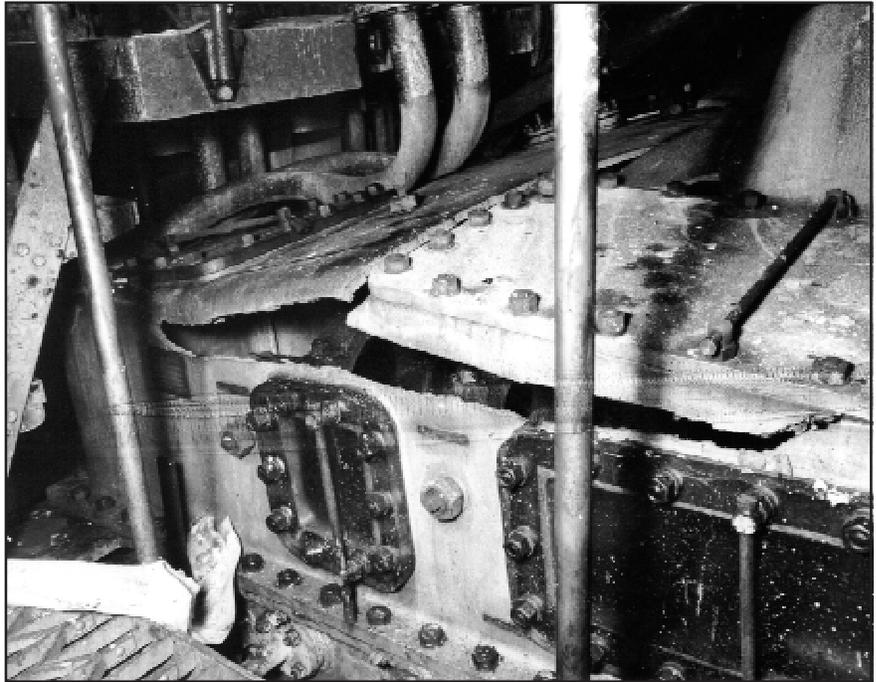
The violent force of the explosion inside *Kootenay*'s gearbox ruptured the aluminum gear casing. Steel is now used in place of aluminum in modern gearbox covers.
